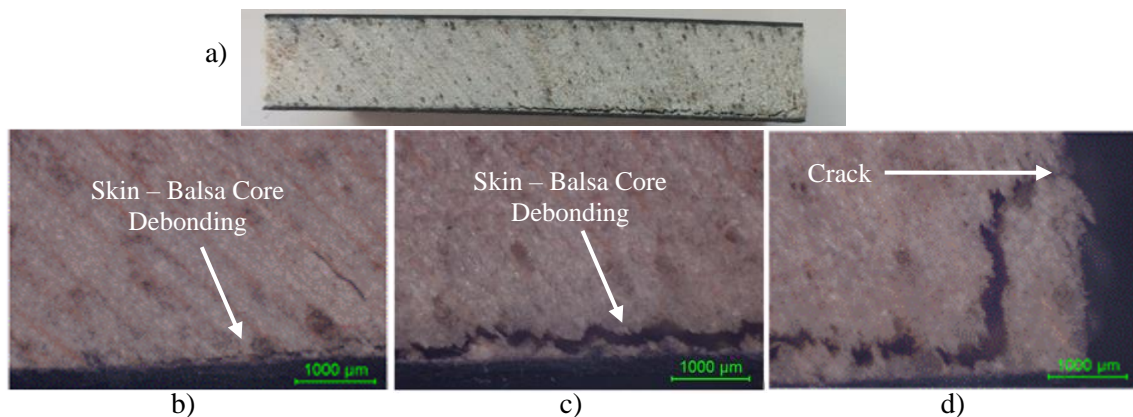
Failure modes of the CFRP-balsa specimens tested on impact, a) cross section of the specimen; b) and c) skin-balsa core debonding views; d) balsa core cracking (magnification 25X)
